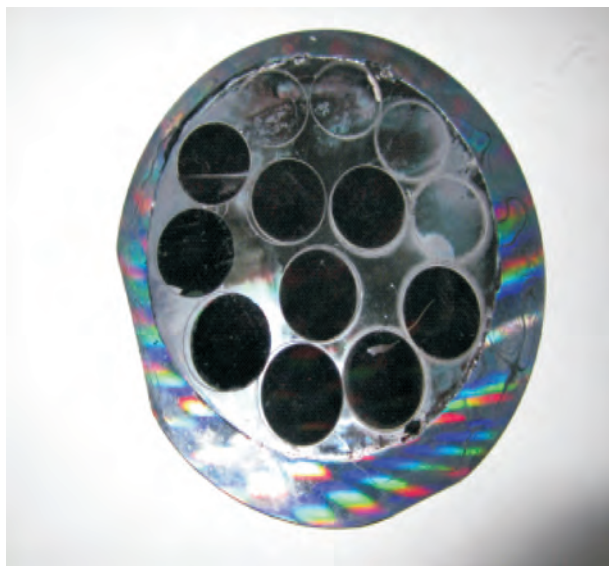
Photograph of SiMCP which was cut into circle shapes by a laser cutting machine.
